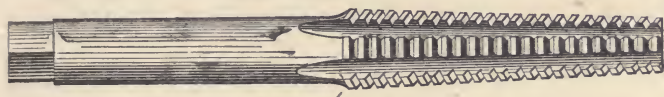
SCREW REAMER FOR PLATE-WORK.
